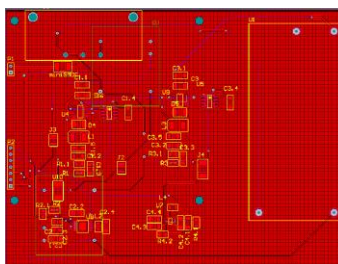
PCB Design of the Power Management Board with a Poly-pour layer added
